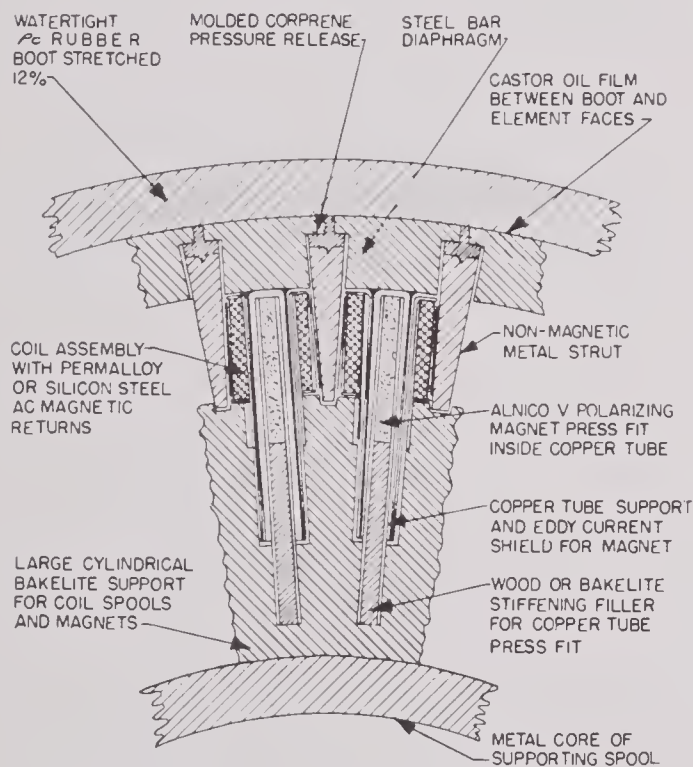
General design of element support and housing for a tube-and-plate type of scanning sonar transducer with rubber boot.
